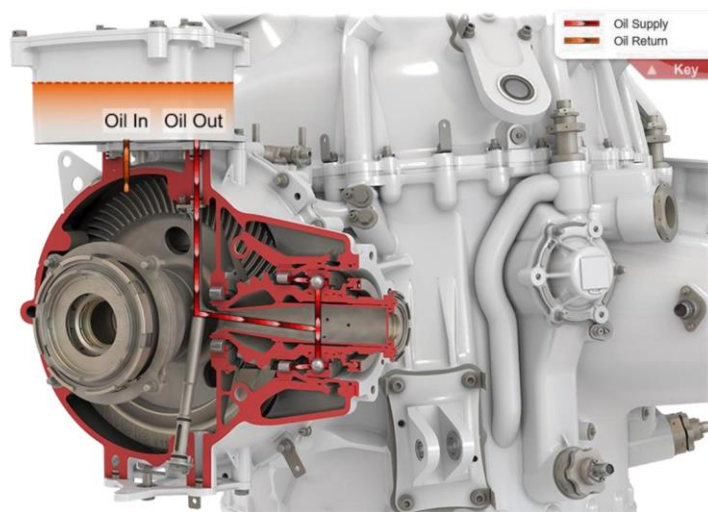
Cross-sectioned view of a Helicopter gear box cooling system [22]
